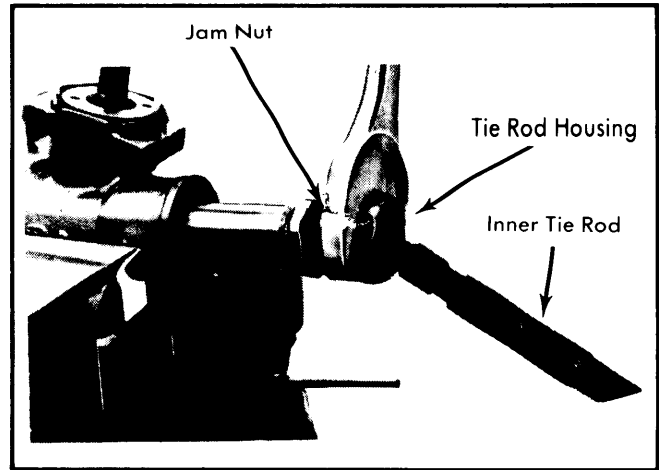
Inner Tie Rod & Housing Removal or Installation
